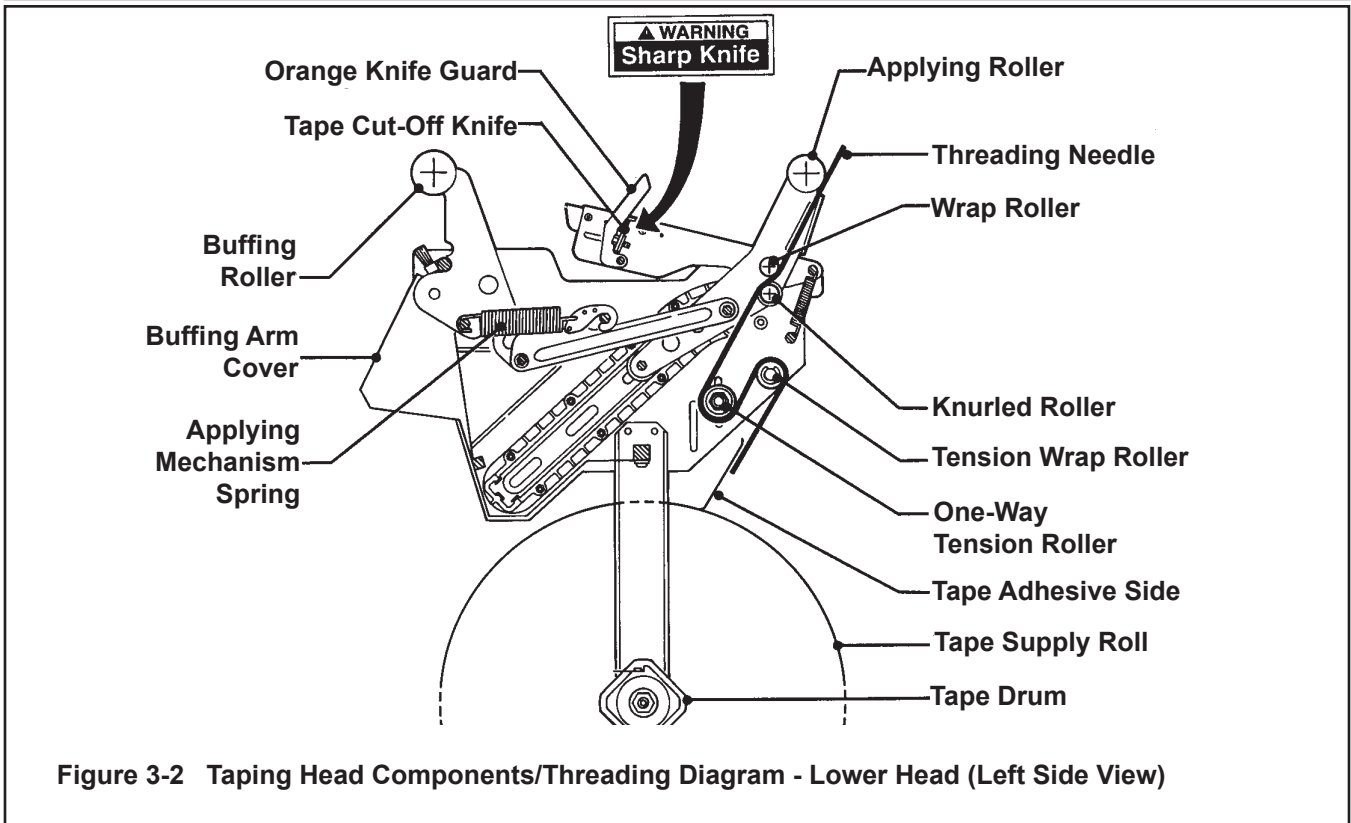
Taping Head Components/Threading Diagram - Lower Head (Left Side View)
